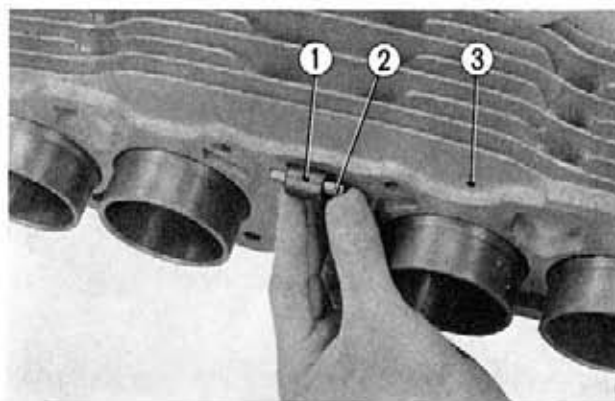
① Cam chain guide ③ Cylinder
